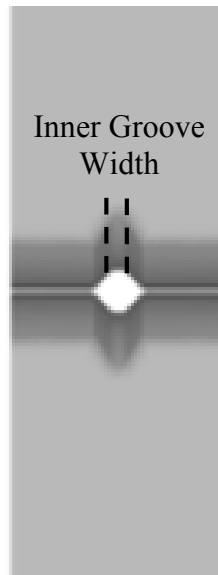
Second groove segment geometry of the final proposed roll forming dies, for the wrench forging process
